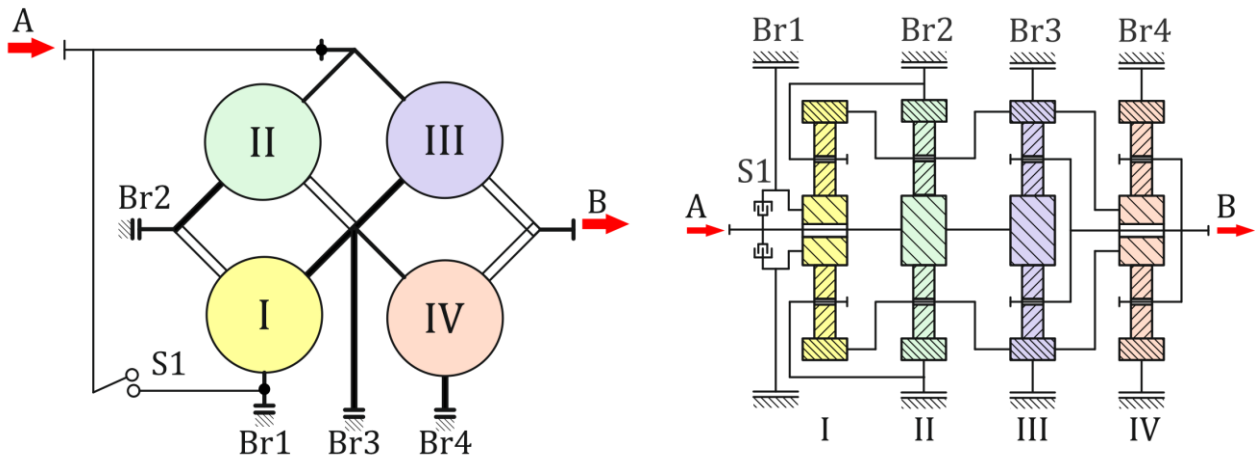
Structural (left) and kinematic scheme (right) of the Wilson gearset
